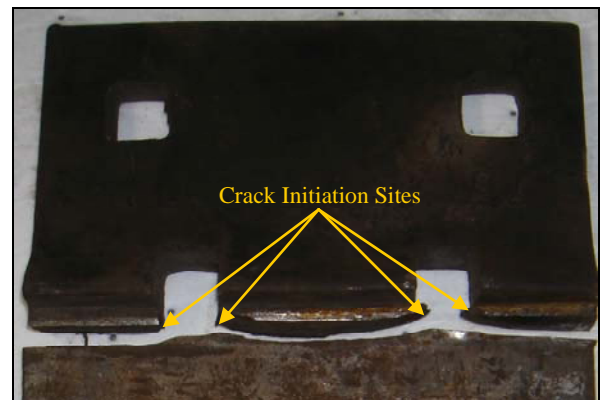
Broken Tie Plate showing Crack Initiation Locations
